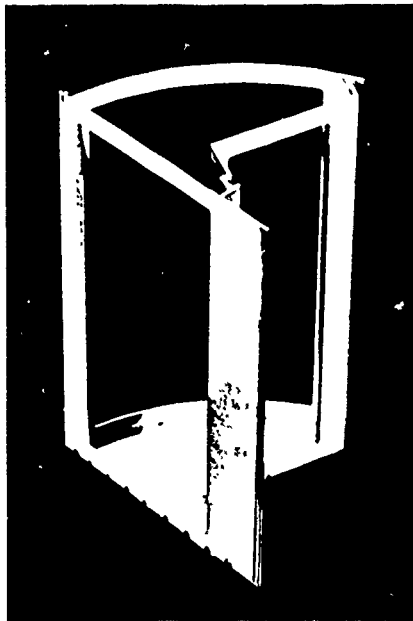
An example of EDM Wire Fabrication (The plate was welded to the bottom after the frame was machined)
